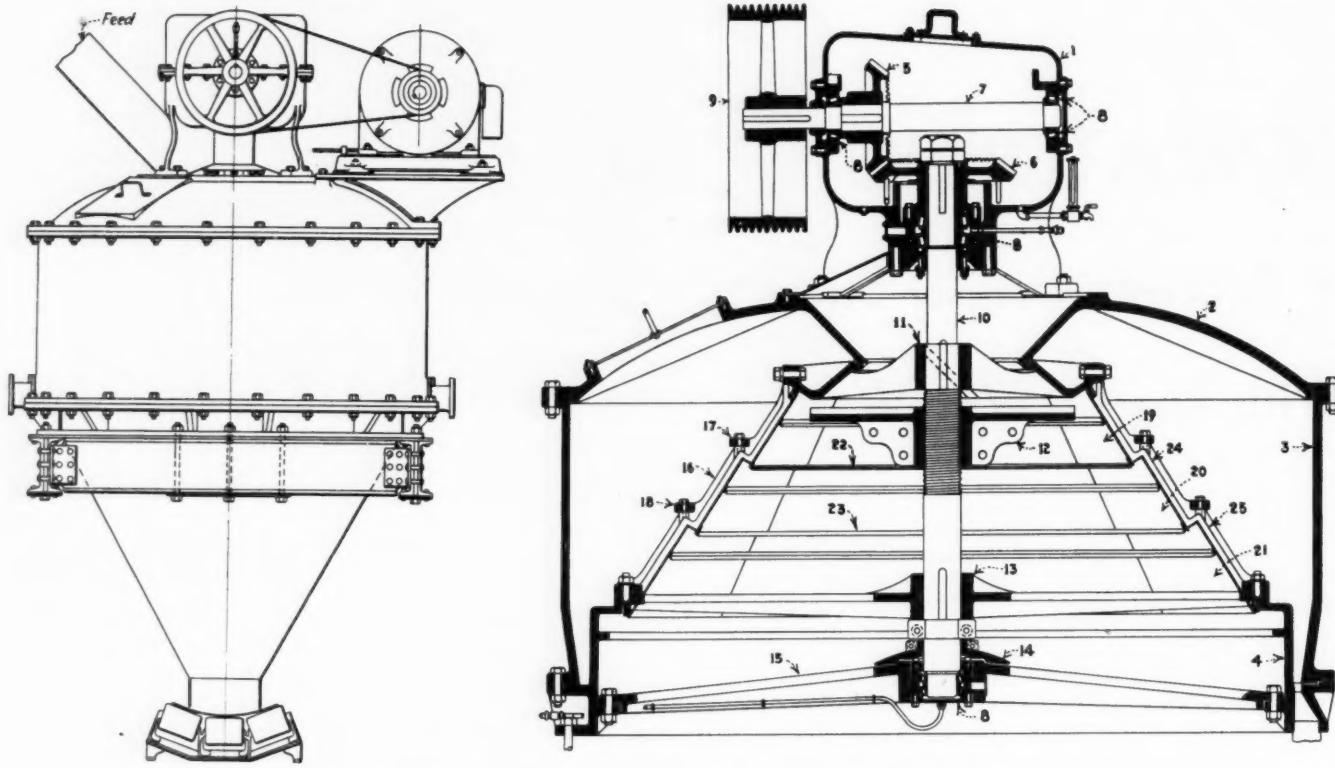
Left, assembly view of Carpenter dryer; right, cross-section
